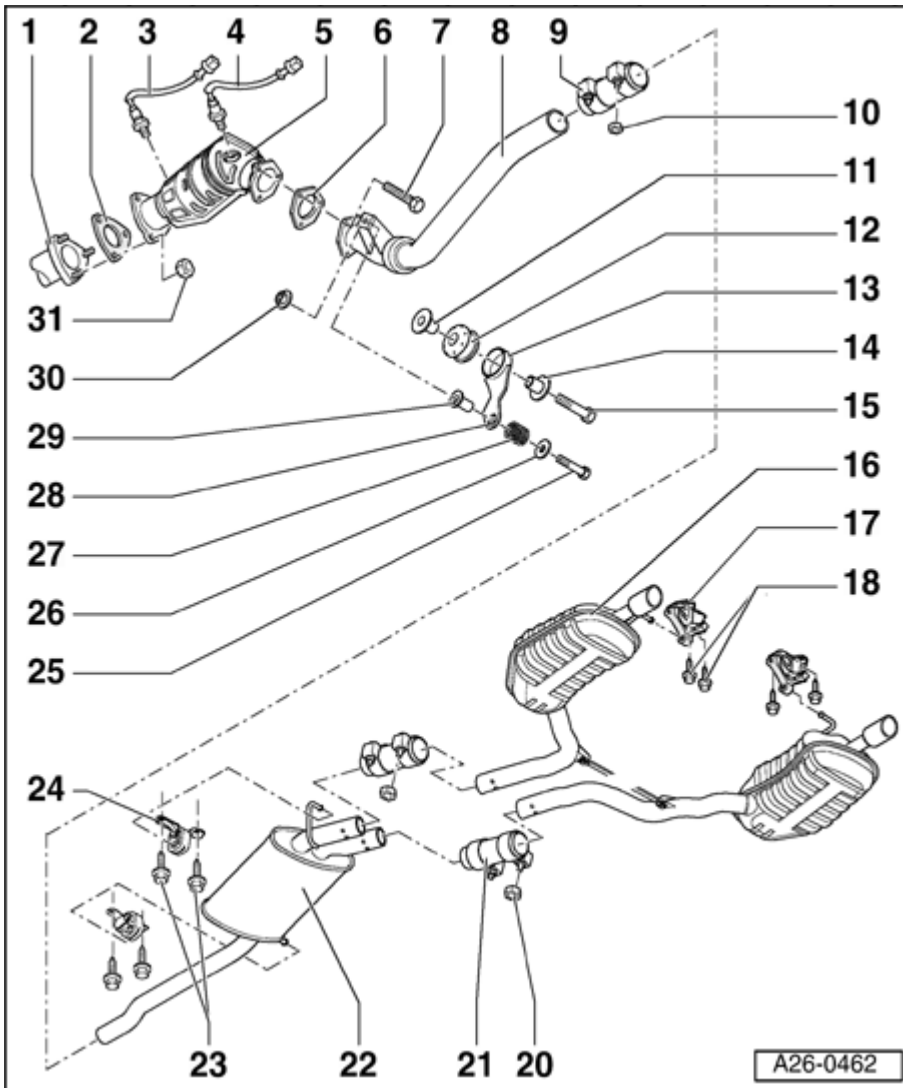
Exhaust System Components, Removing And Installing (Front Wheel Drive Vehicles)
